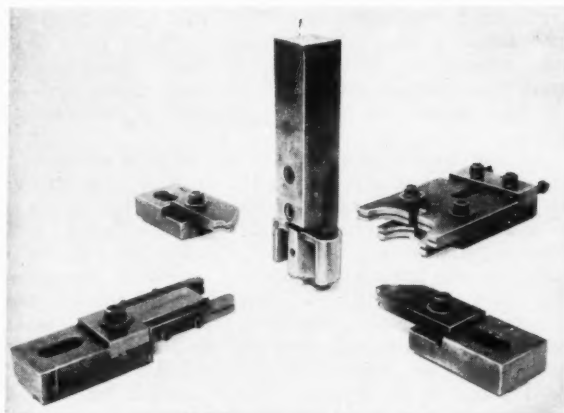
Surfaces and grooves of these wire-forming mandrels which come in contact with the spring-wire stock have been Flame-Plated for extra wear resistance. One manufacturer reports that the Flame-Plated tools last 10 times longer in service than hardened tool-steel parts. Production has also been increased 74 per cent.
